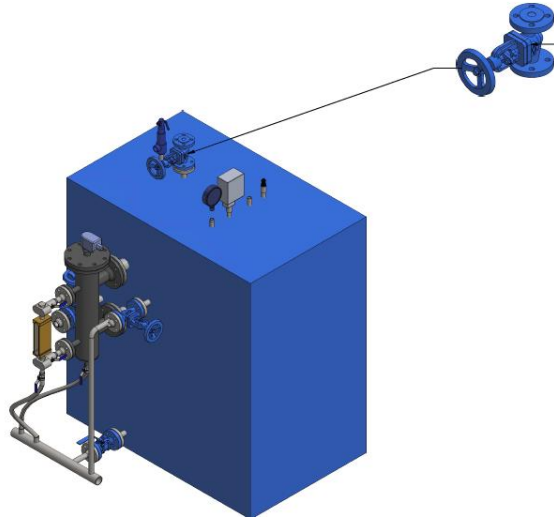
Steam Exit Valve Position on The Boiler
